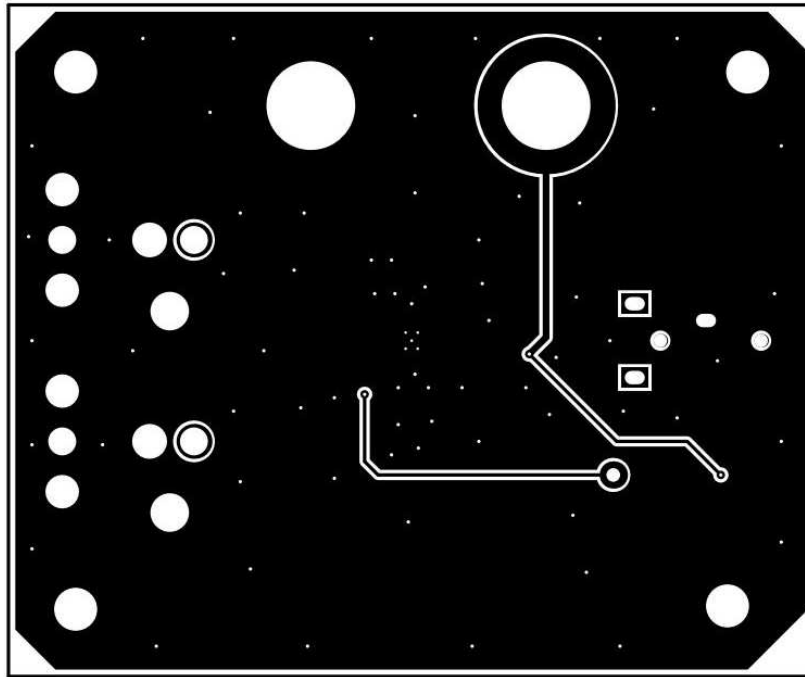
TPA6110A2 EVM PCB Bottom Layer
